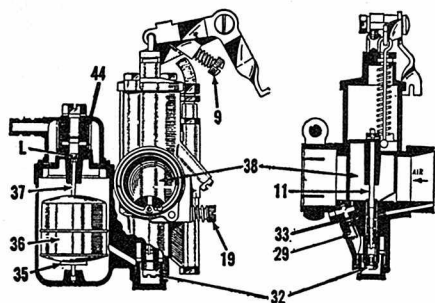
Cross sectional view of typical Del'Orto MA and MB type carburetor. Idle mixture adjustment is accomplished by turning screw (19). Refer to Fig. LM1-2 for legend.
